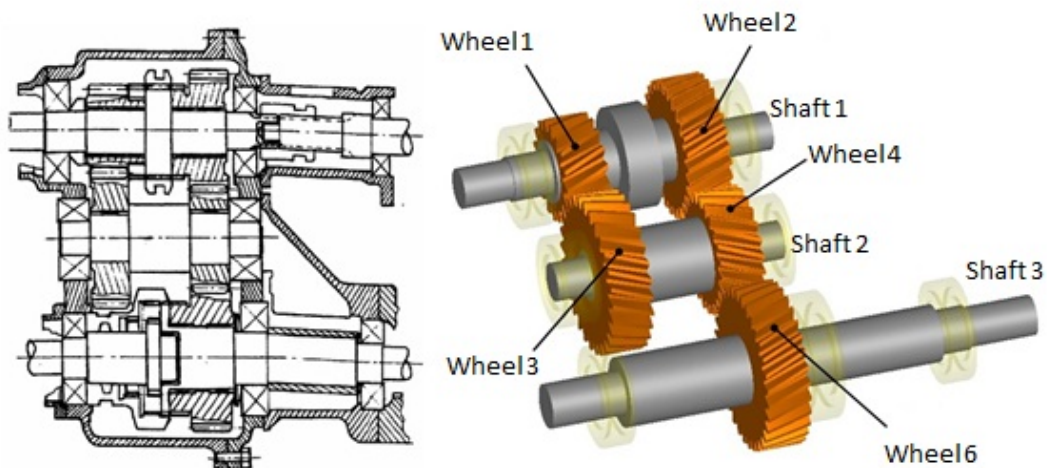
Cross section of the transfer gearbox and 3D model view.
